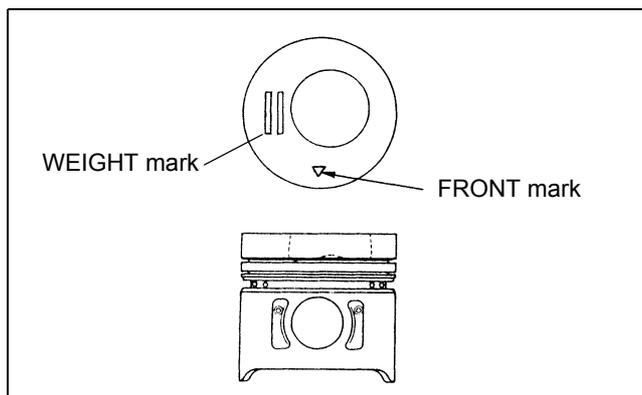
FRONT mark and WEIGHT mark on piston (direct injection type)
